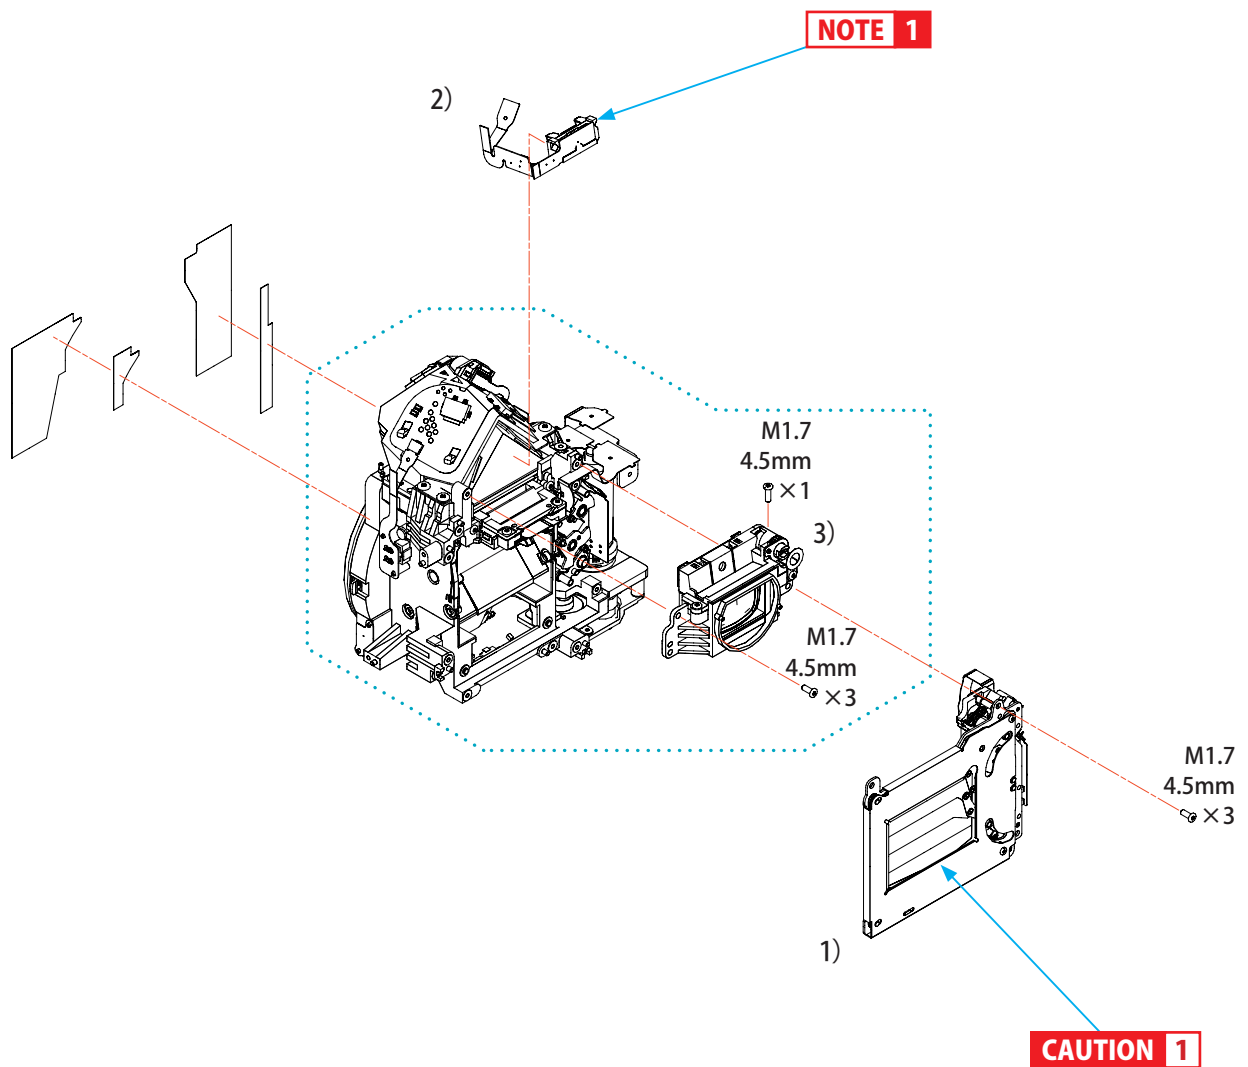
Shutter Ass'y / Auto Exposure FPC Ass'y / Eyepiece Ass'y Removal
